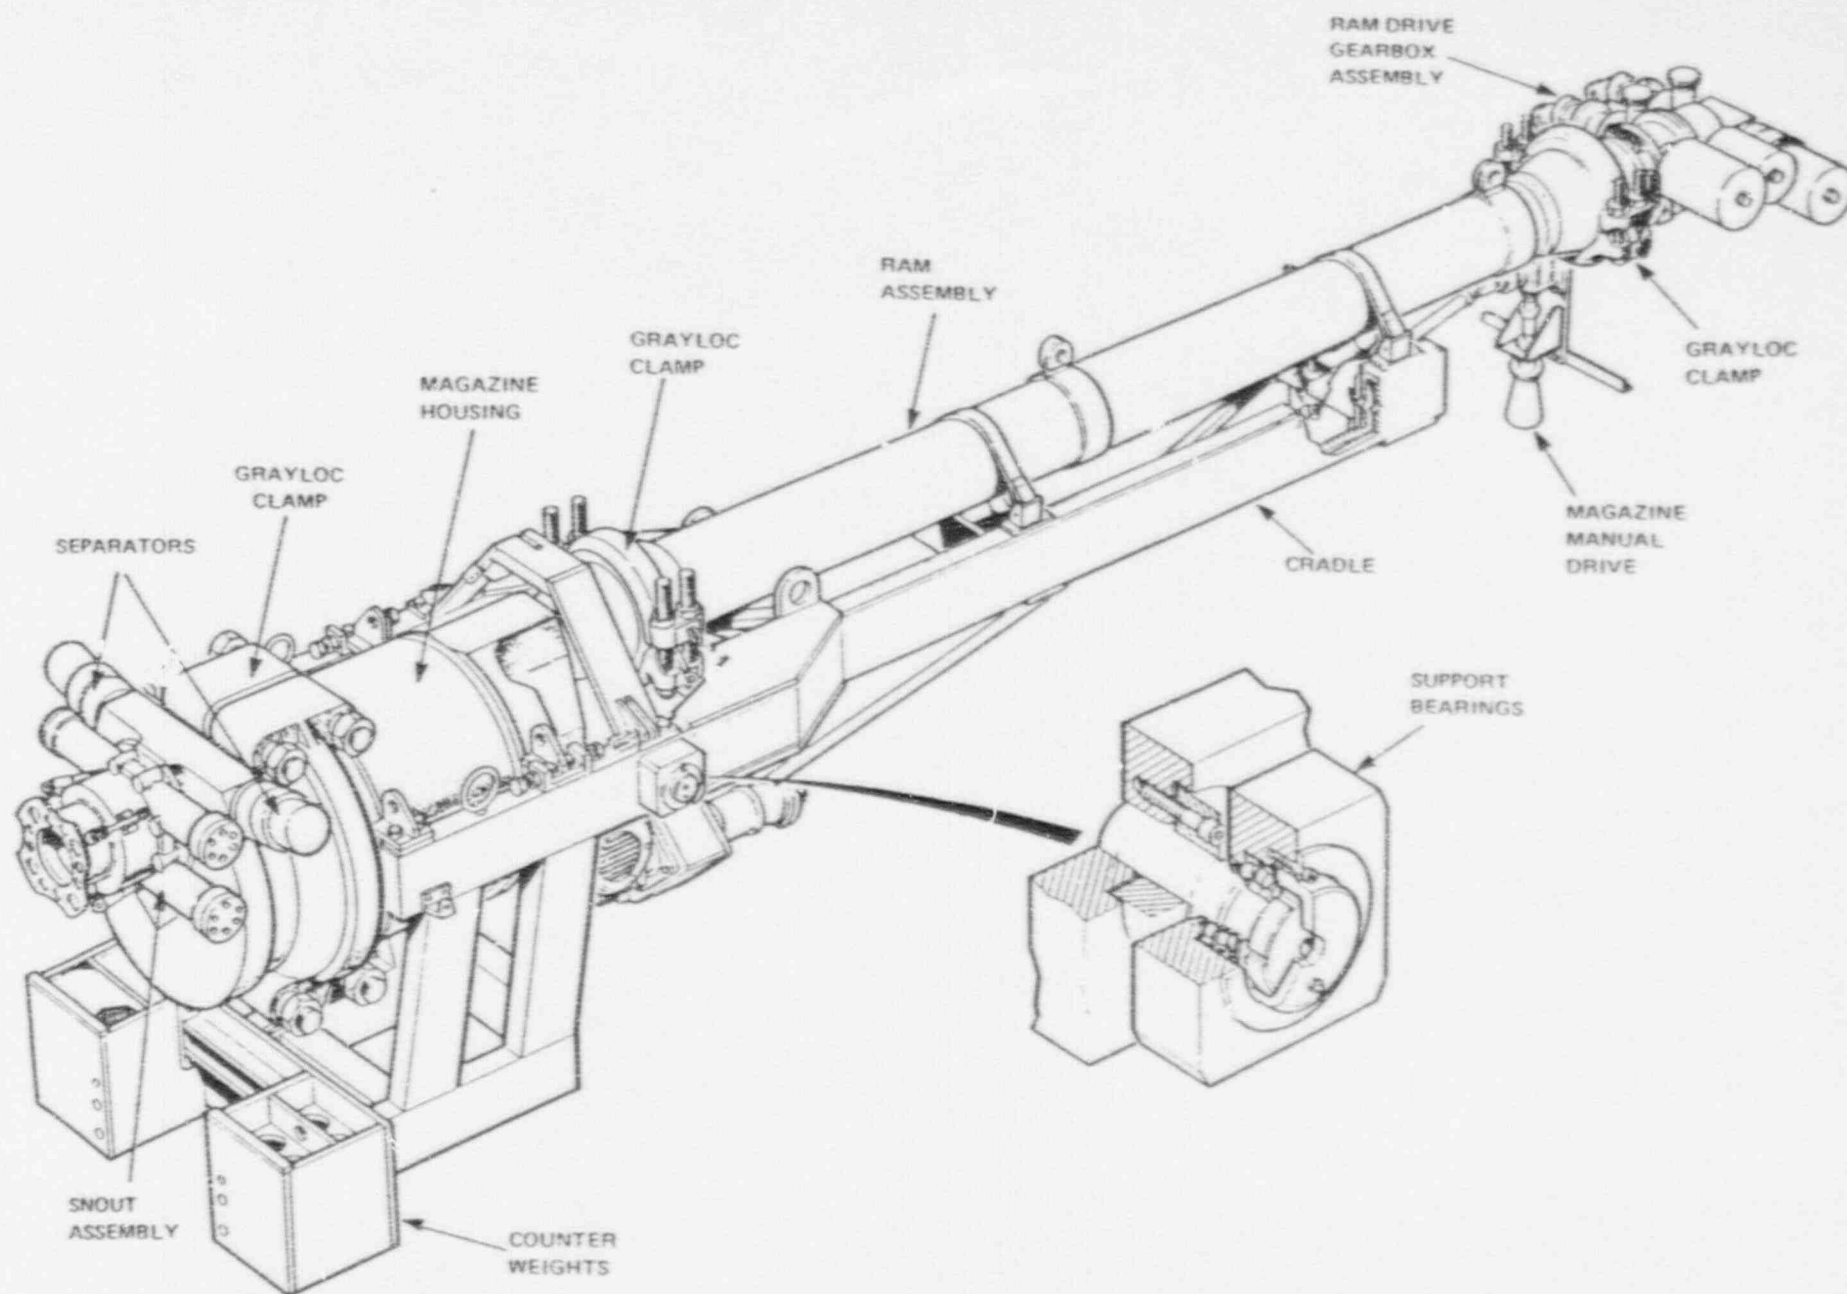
CANDU 6 FUELING MACHINE HEAD
